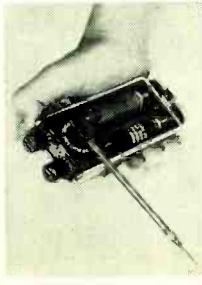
Miniature torch is useful for soldering, brazing and welding small parts. Microflame unit uses butane and oxygen. Makes a neat handful in use.
